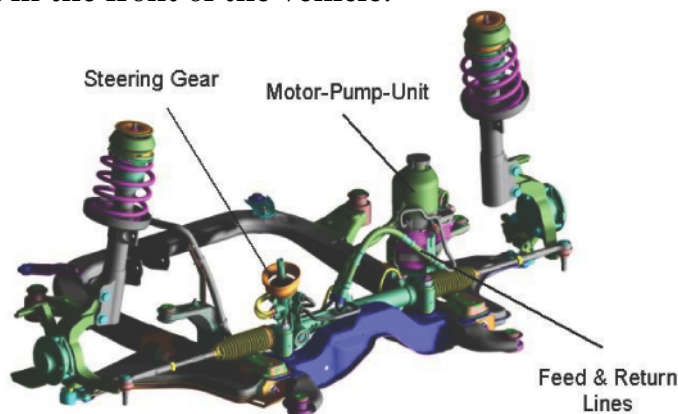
EPHS system when assembled in the front of the vehicle.
